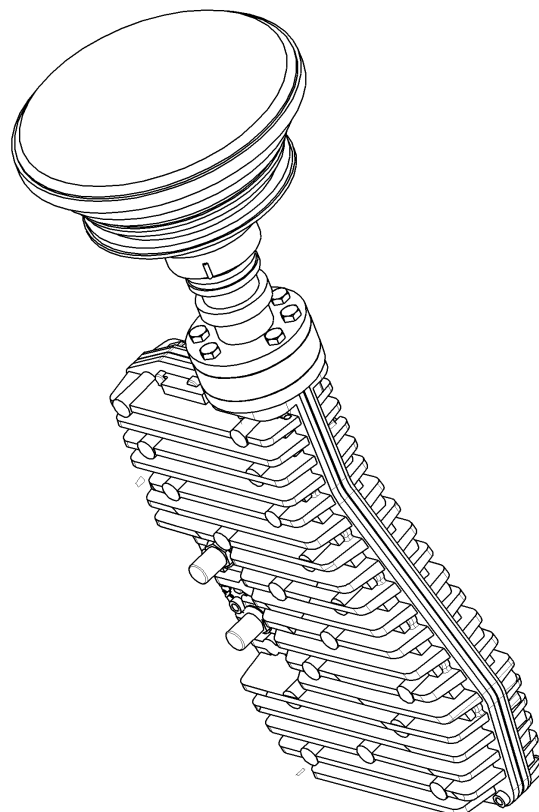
Mount the antenna feed to the adapter and fasten using M4 screws.
